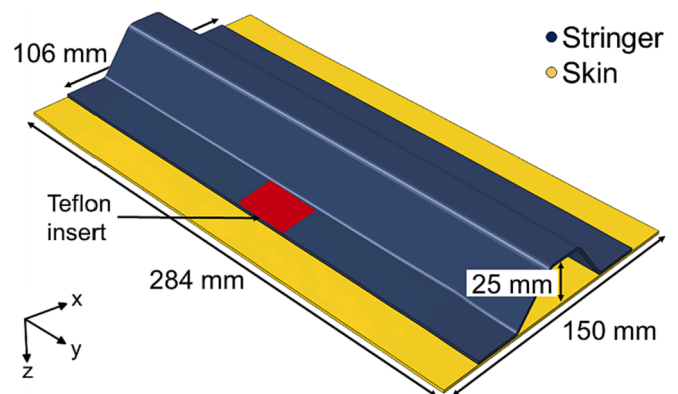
A Single-Stringer Compression Specimen (SSCS).
